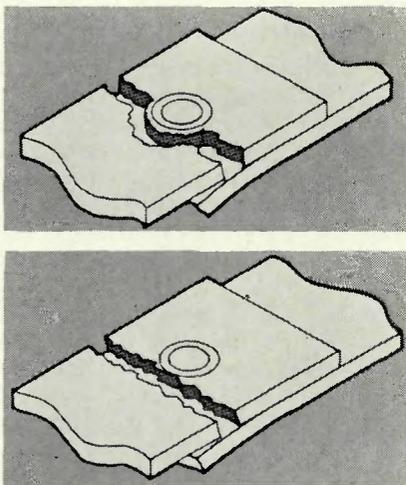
Typical resistance spot weld fatigue failures. A (top)—conventional weld; B (bottom)—high fatigue weld
